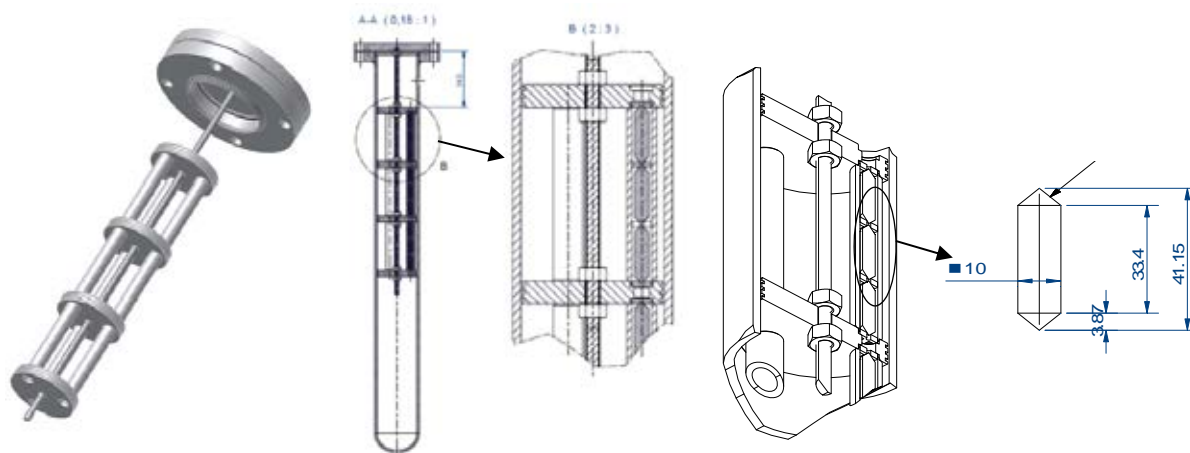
3-D view and a detail of CHEOPE III test section; detail of one sample.
